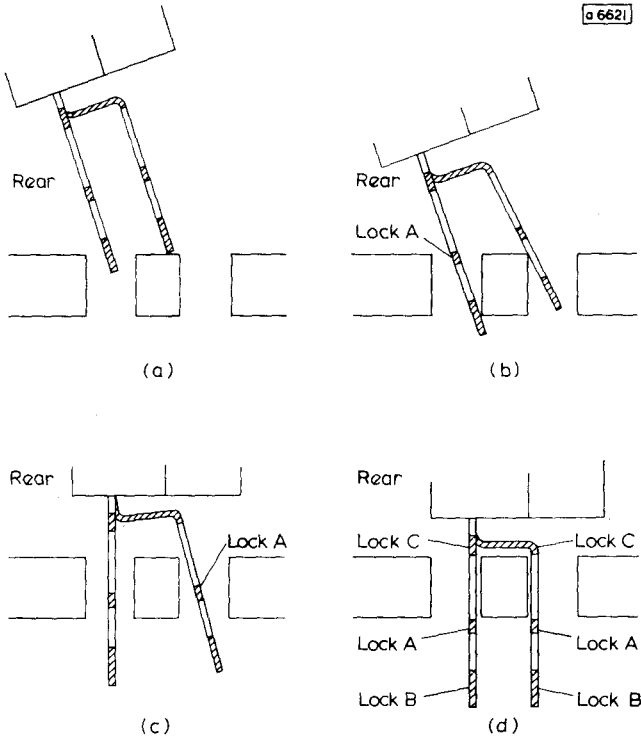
Mounting procedure for "Lockfit" transistors using e-grid printed-wiring boards; procedure is similar for e-grid boards
